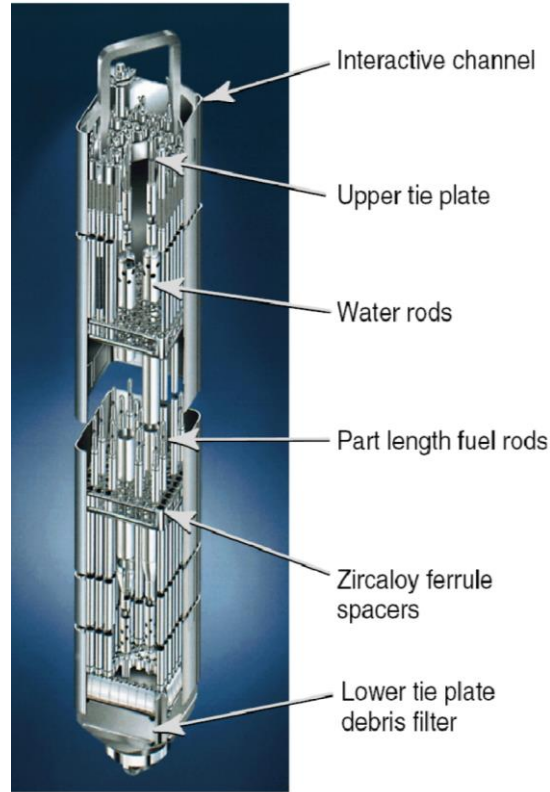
Side View of GE14 Fuel Assembly (U.S. Nuclear Regulatory Commission, 2011)
